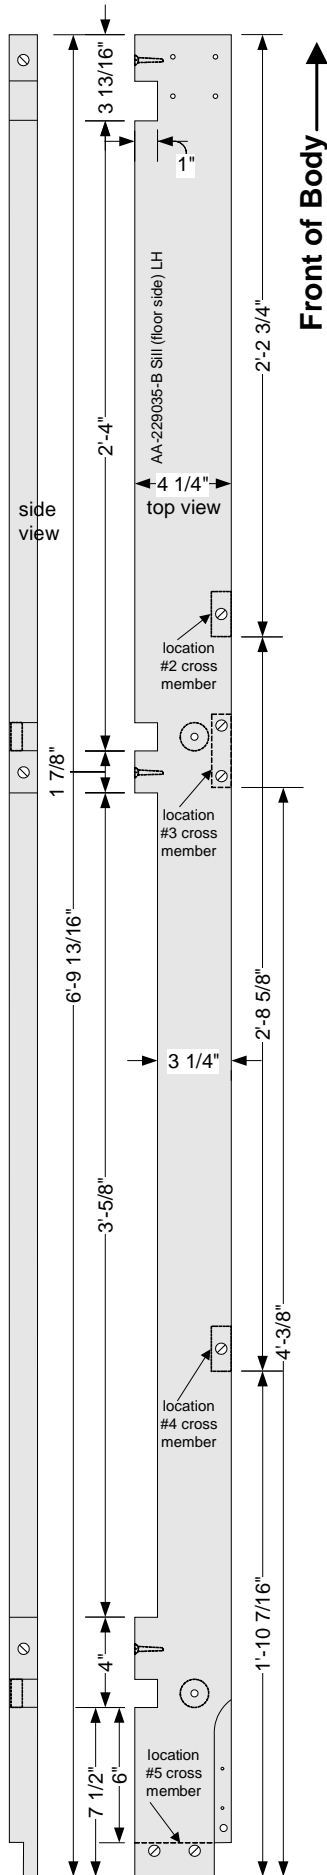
Floor Sill Assembly - Floor Side Sill
